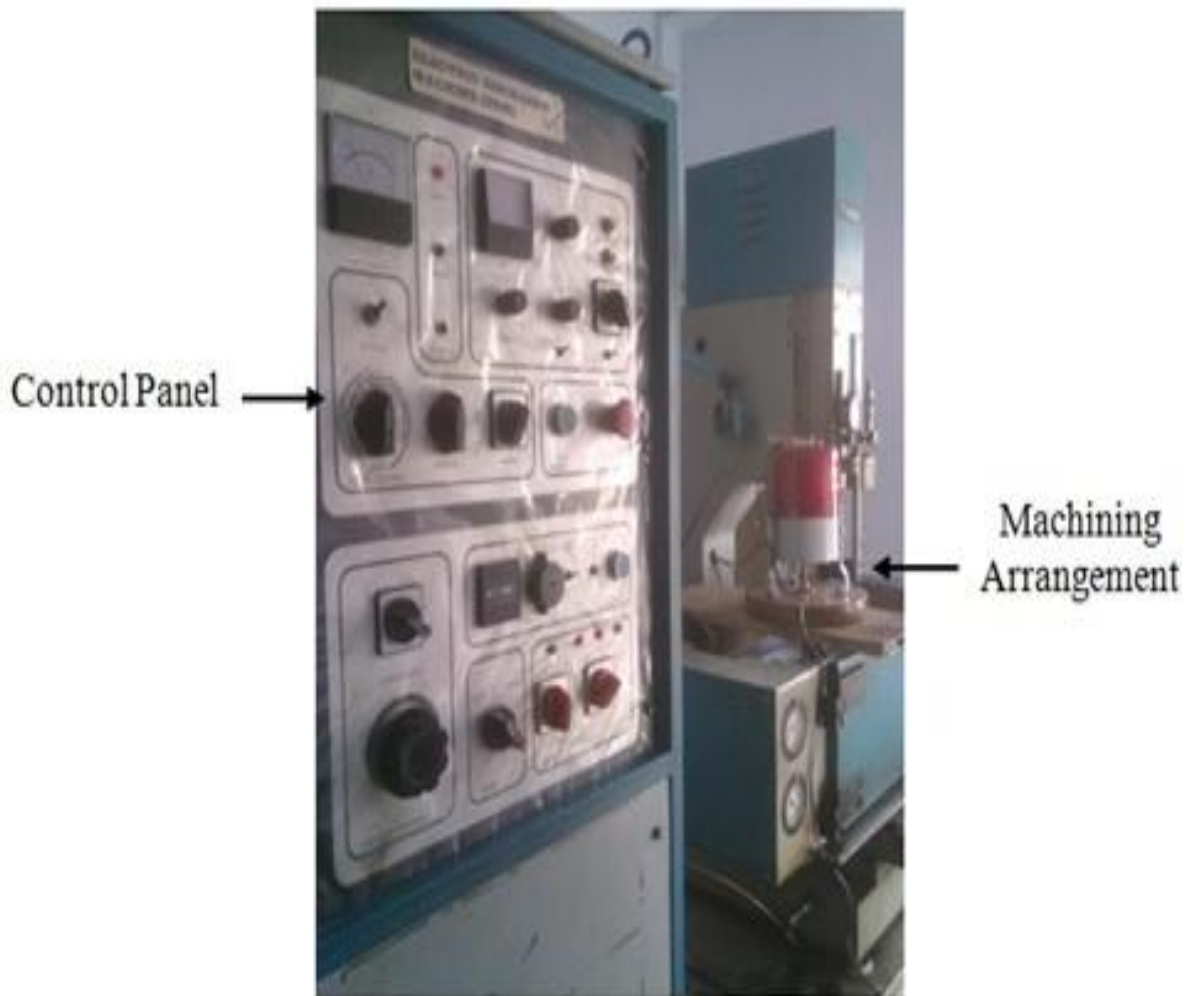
EDM machine (Courtesy by: MT Lab, Thapar University, Patiala)
